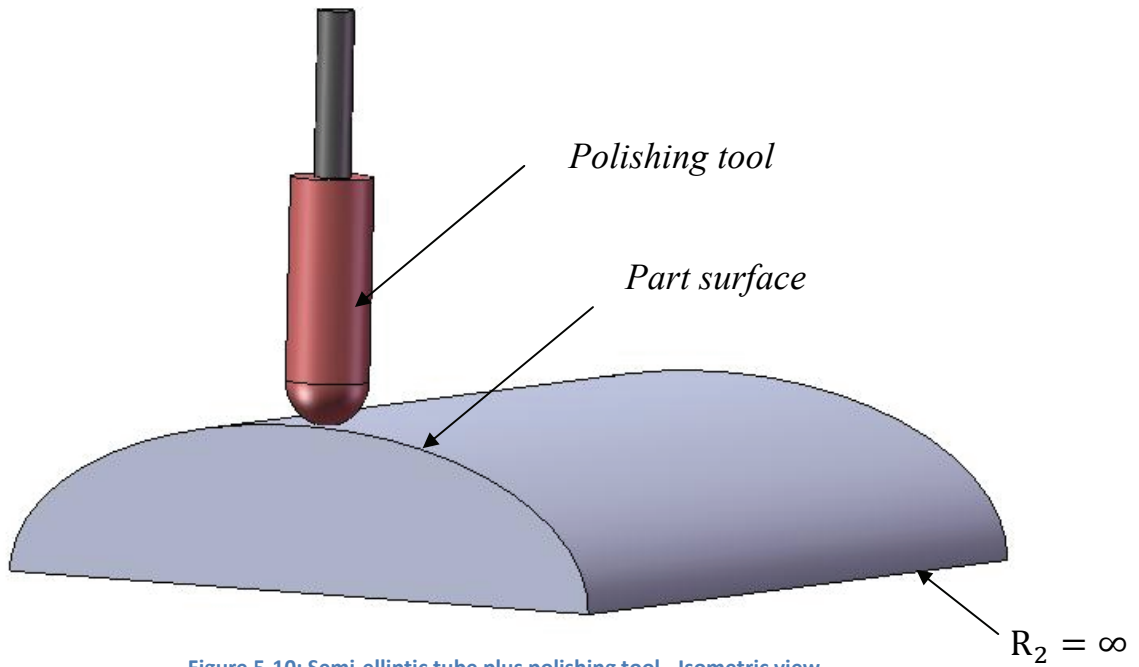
Semi-elliptic tube plus polishing tool - Isometric view
